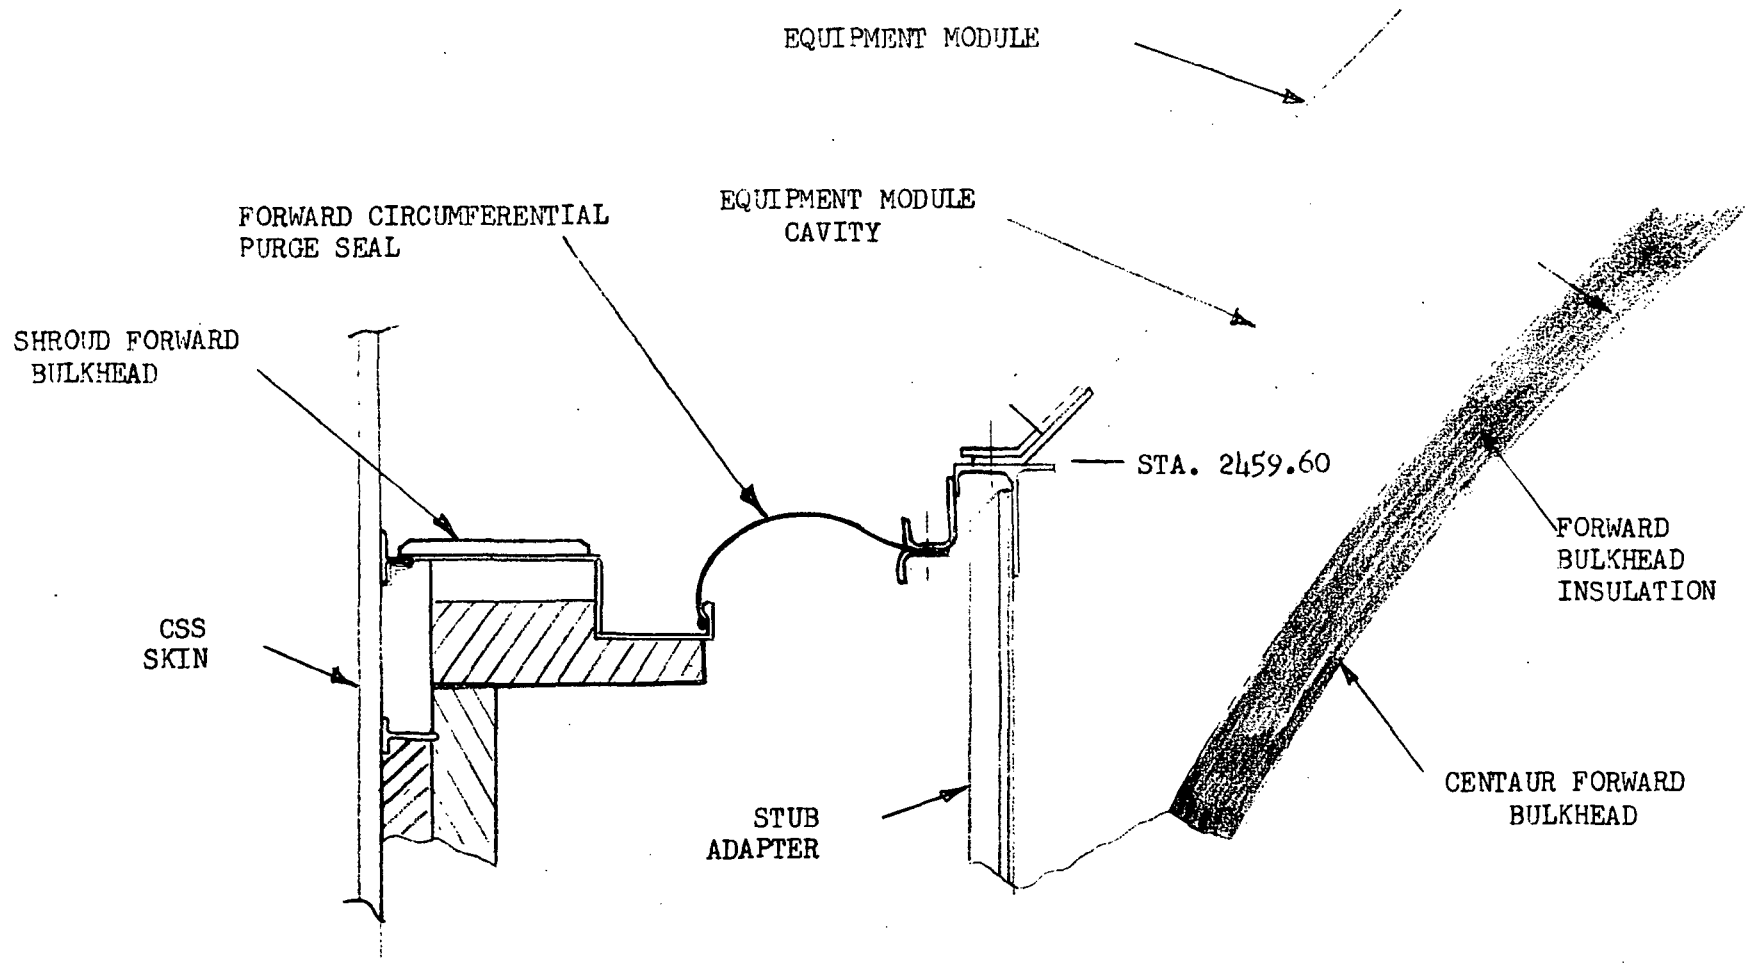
SECTION THROUGH SHROUD/CENTAUR FORWARD CIRCUMFERENTIAL PURGE SEAL INSTALLATION
